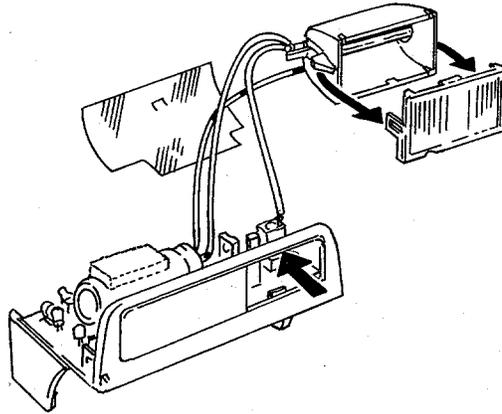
Removing Flashtube Assembly, Flash Shield and Insulator
